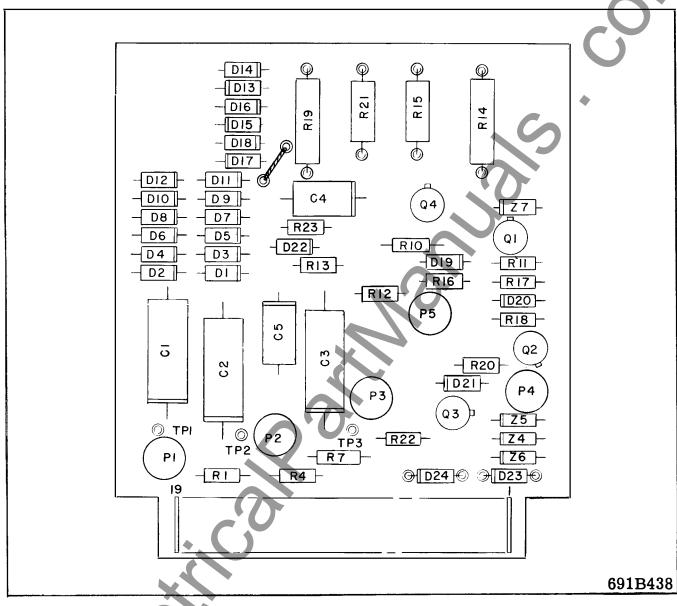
Component location on printed circuit board for the type SI-1 Relay.
